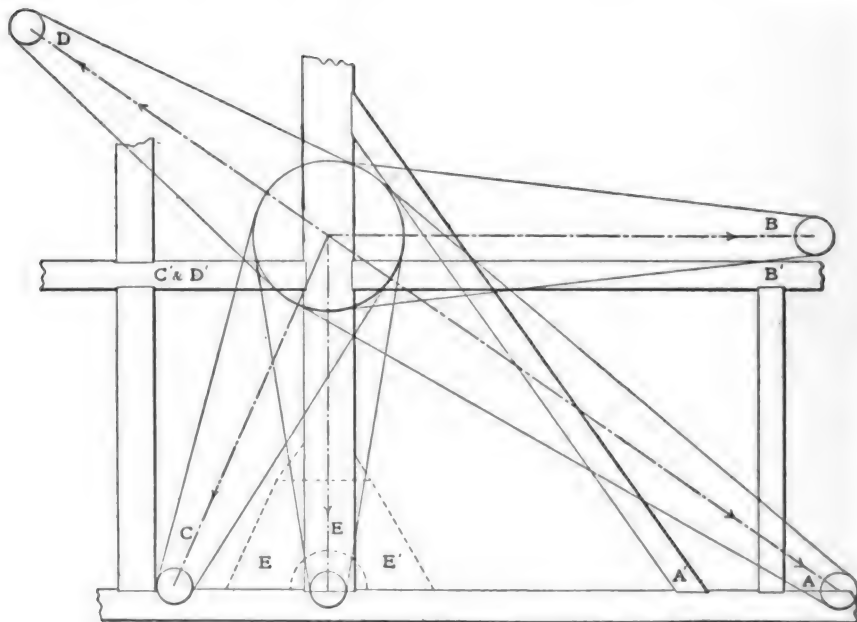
STAMP-MILL FRAMES AND METHOD OF DRIVE.
